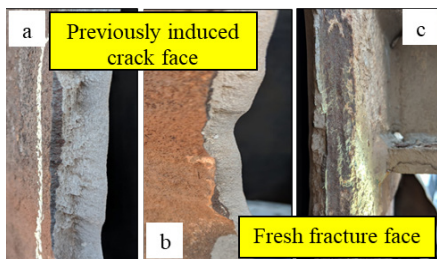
Fracture surface on (a-b) Shell layer side (c) Davit arm pad side
